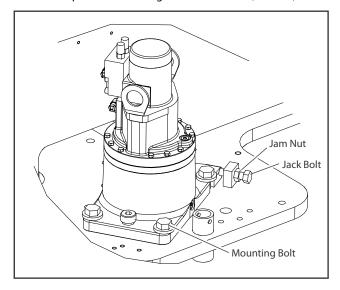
Swing Drive Jam Nut and Mounting Bolt
